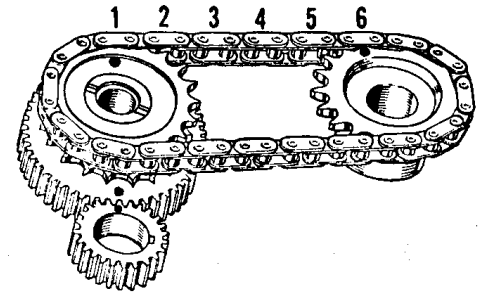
View of timing marks on crankshaft gear, idler gear, sprocket and camshaft sprocket. Ignition timing chain and camshaft timing chain must be installed on idler gear sprockets and camshaft sprocket before installing gear and camshaft sprocket.
